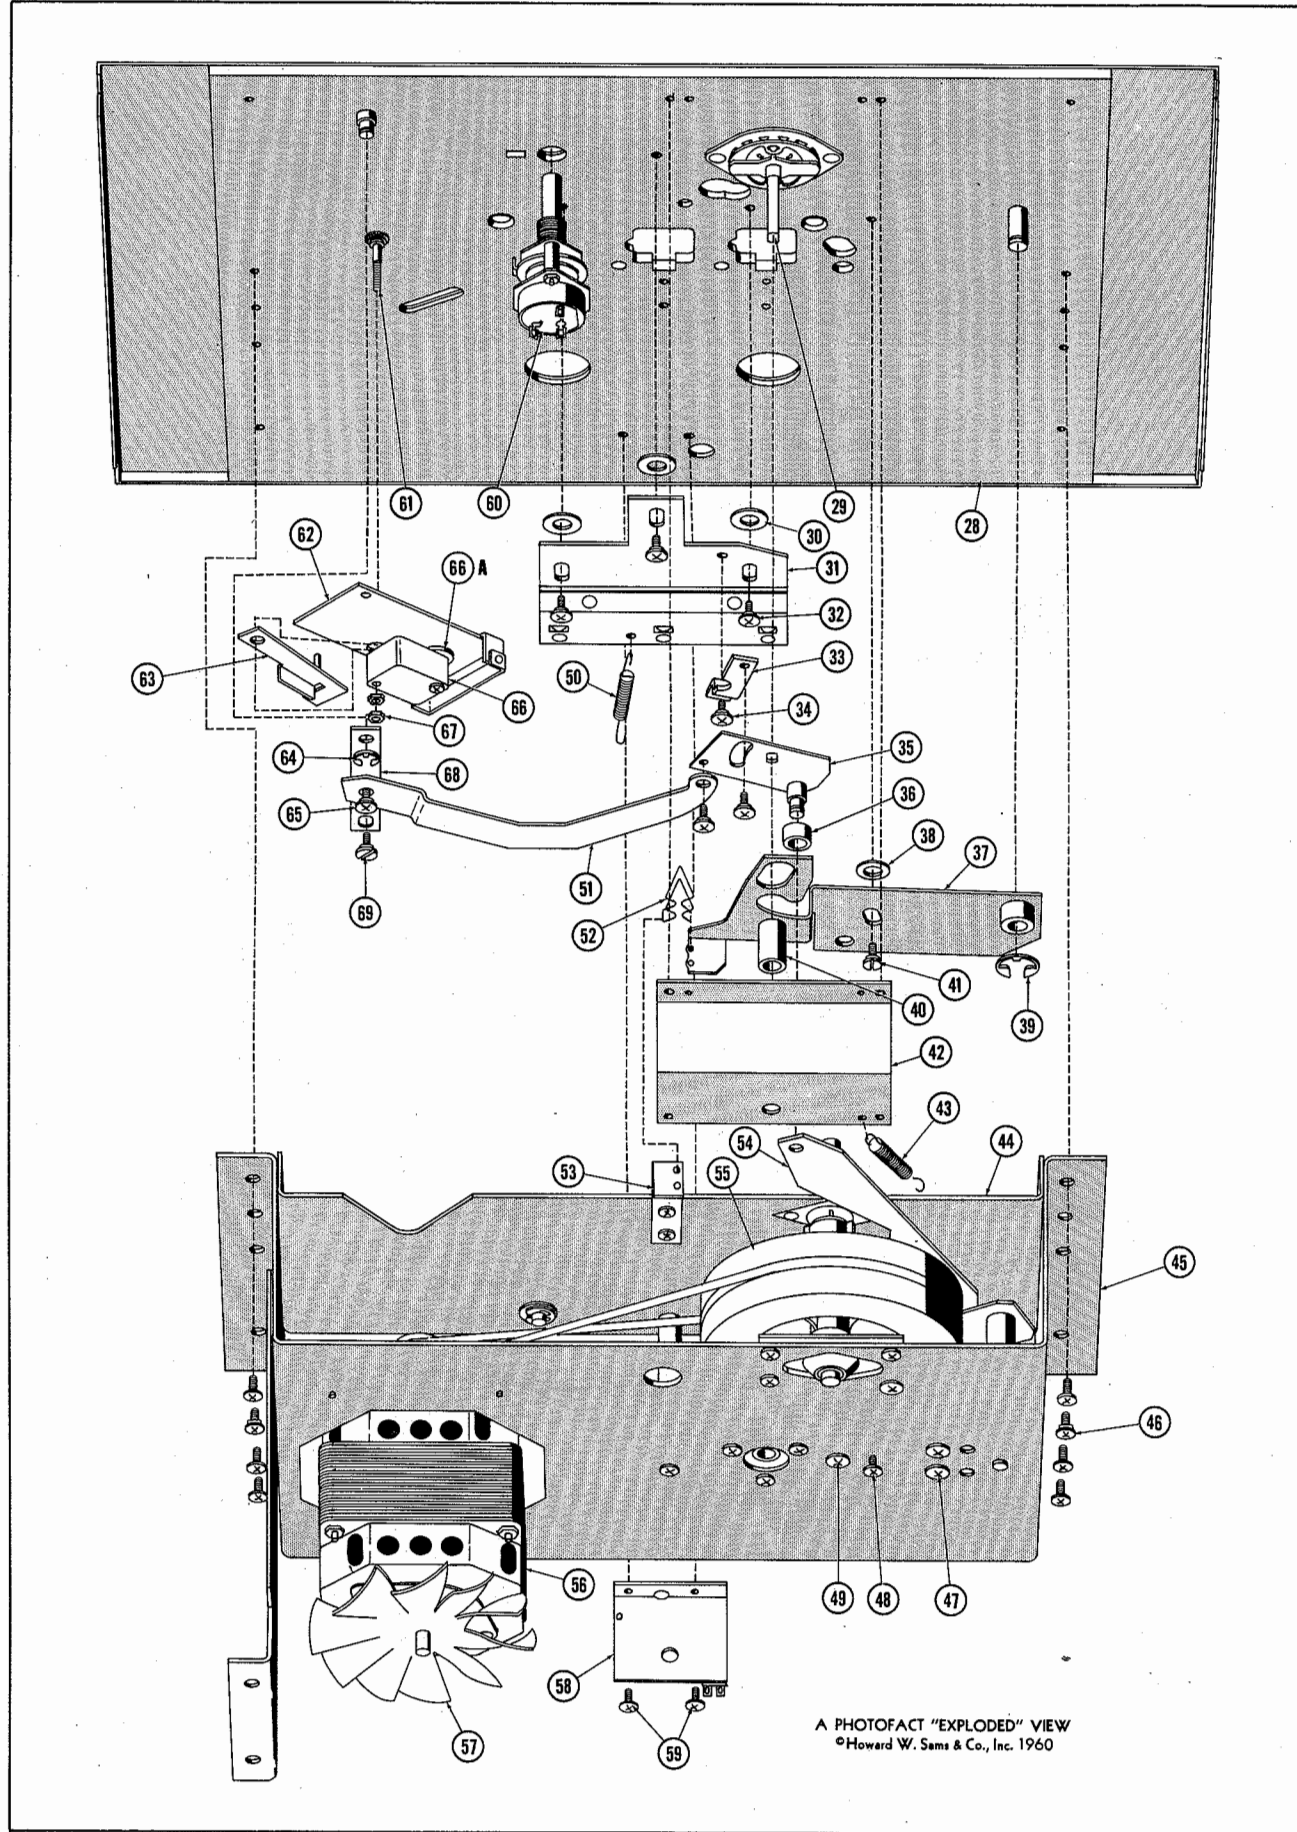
B EXPLODED VIEW OF PARTS BELOW DECK PLATE
